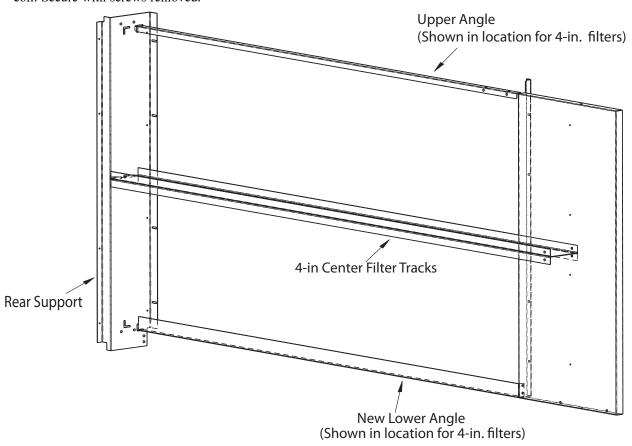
Filter Rack Shown with Hardware for 4-in. Filters (44-in. Height Unit Shown)
